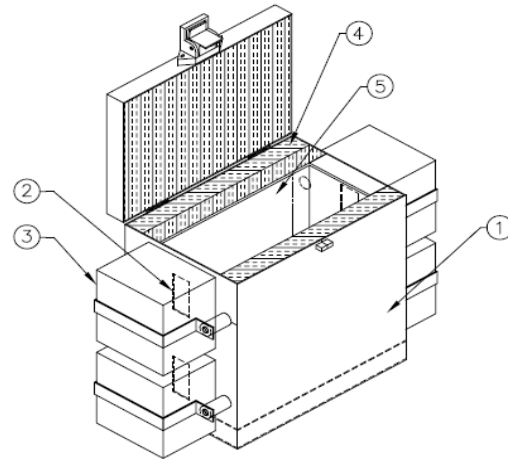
Schematic Diagram of thermoelectric Refrigeration Cabinet (1) Outer casing (2) Peltier Module (3) Heat sink fan assembly (4) PUF Insulation sheet (5) Copper lining
